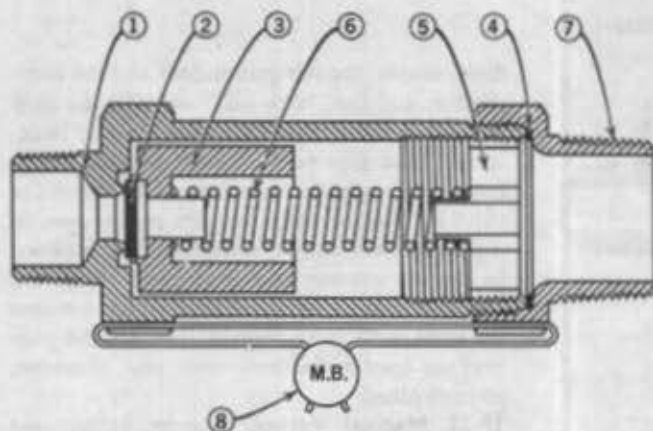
Typical pressure relief valve. (Courtesy Mueller Brass Company.)
